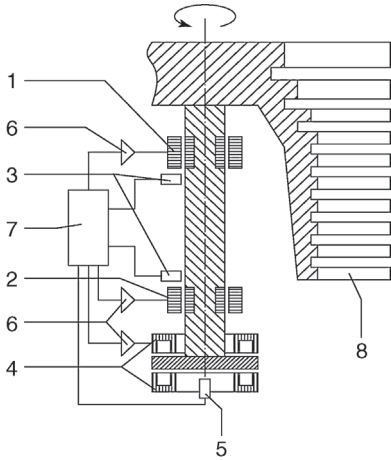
Model of an active five-axis magnetic rotor bearing system. Two additional radial sensors and lifting magnets are arranged perpendicularly to the plane of projection. 1, 2: radial magnets; 3: radial sensors; 4: axial magnets; 5: axial sensor; 6: current amplifiers; 7: controller; 8: rotor blade.
